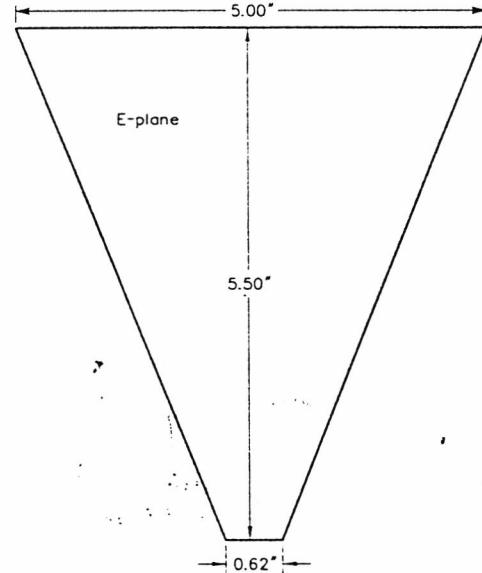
17-dBi 5760-MHz horn dimensions. The horn solders to WR-137 waveguide. The dotted line marks the inside solder seam.
